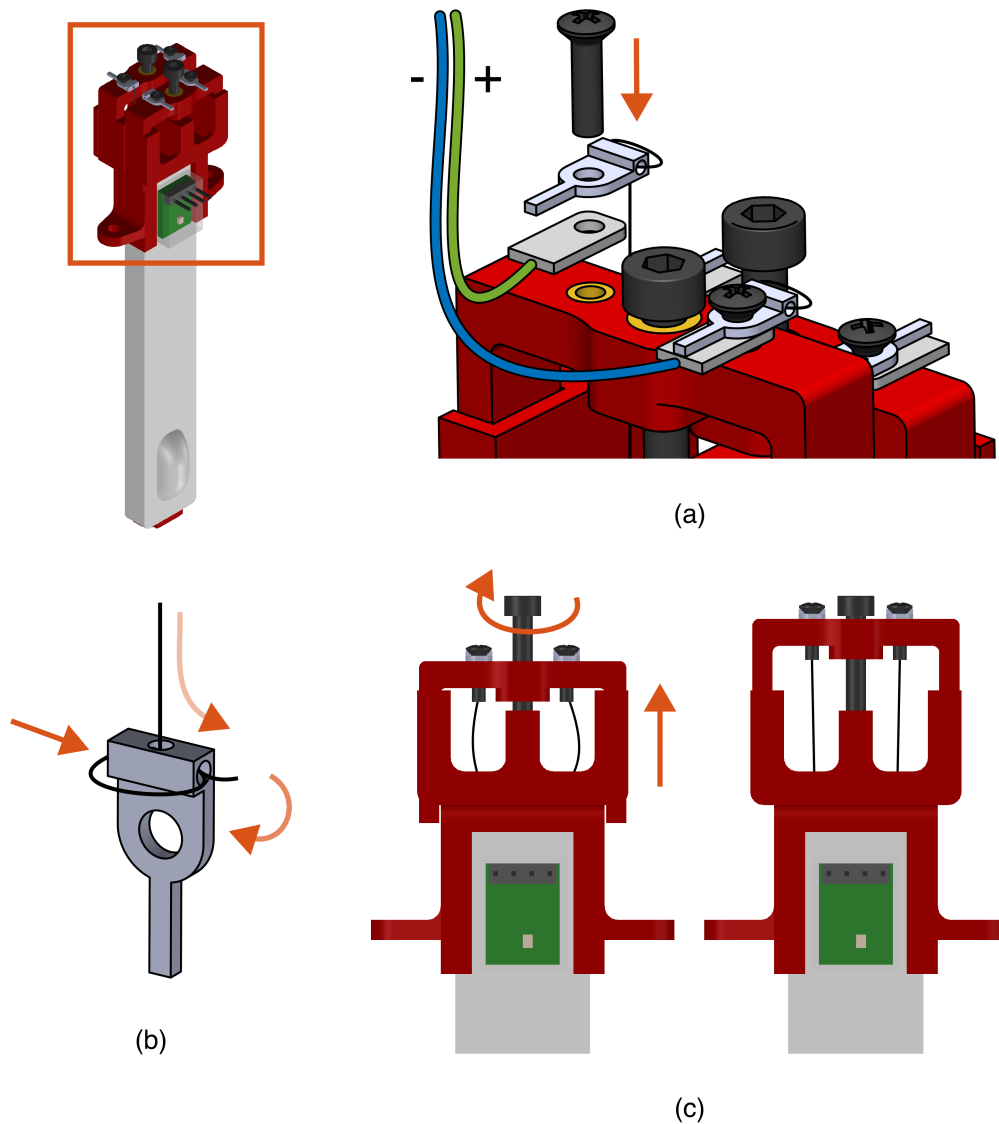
(a) Electronic connection and mechanical fixation of the tendon wires are achieved clamping the wire crimp and a ring connector with a single screw secured to the C-shaped bracket. (b) SMA wire tendon crimping method. The SMA wire is threaded through a commercial crimp and then secured in place using crimping pliers (not shown). (c) Tensioning system. Adjusting the tensioning screw the C-shaped bracket slides up and down regulating the pretension of the tendons.
